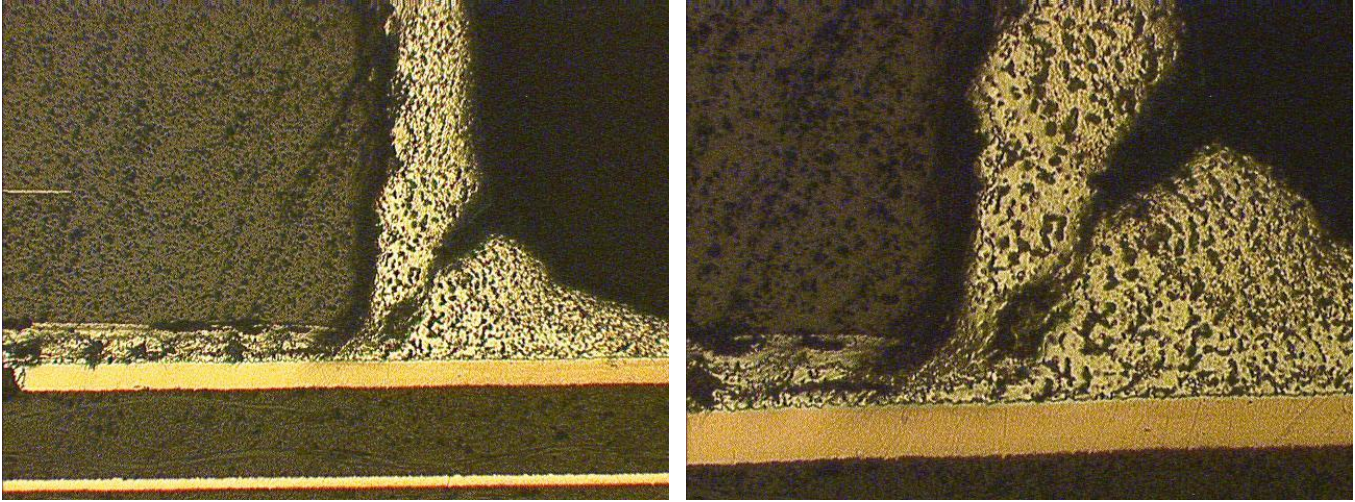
CLCC-20 Solder Joints, Board 103, Component U22, SN100C/SnPb, Failed @ 828 Cycles
